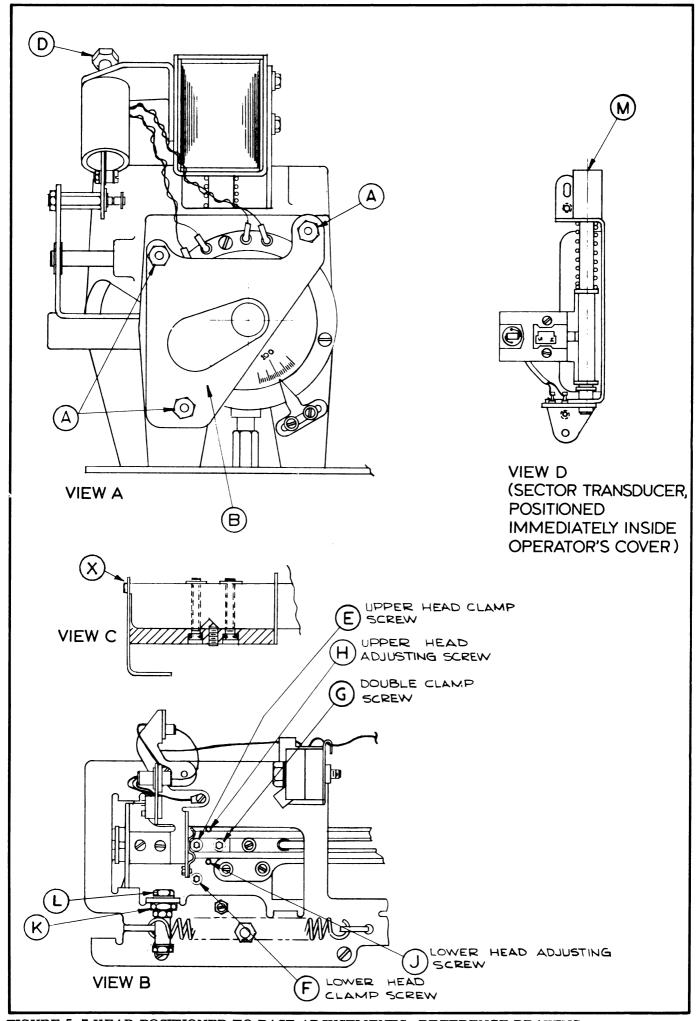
HEAD POSITIONER TO BASE ADJUSTMENTS, REFERENCE DRAWING
